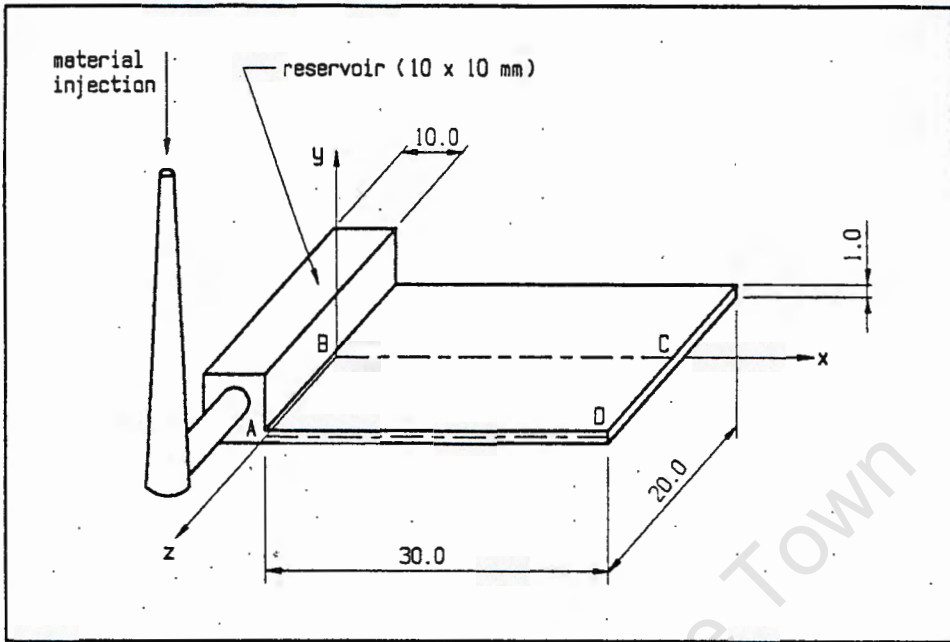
Geometry of the cavity for an injection moulded part.
